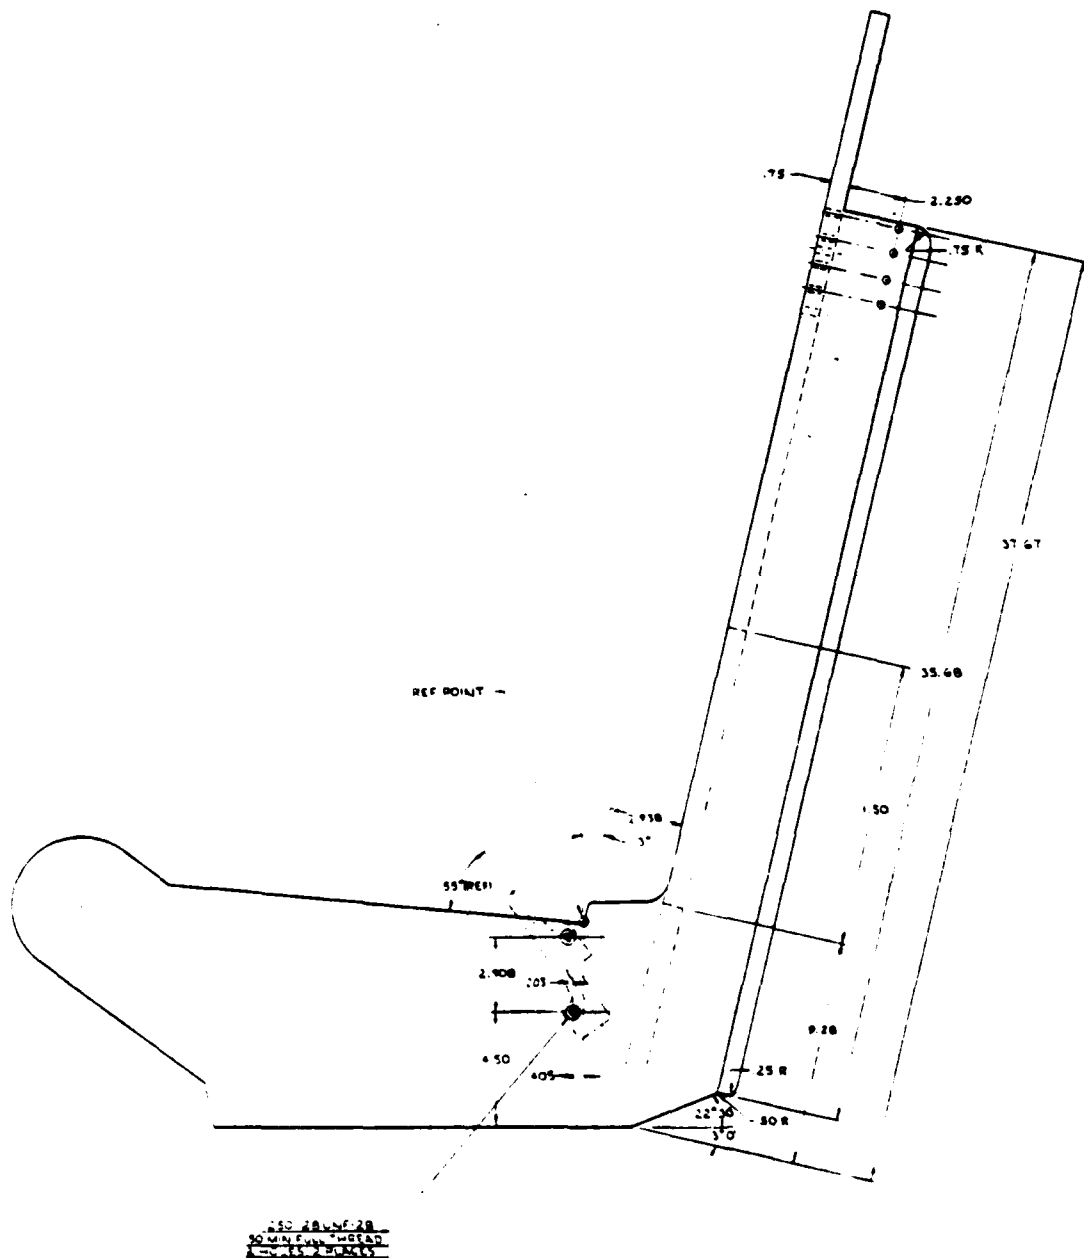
Dimensionalized Drawing of MPES Seat Structure
